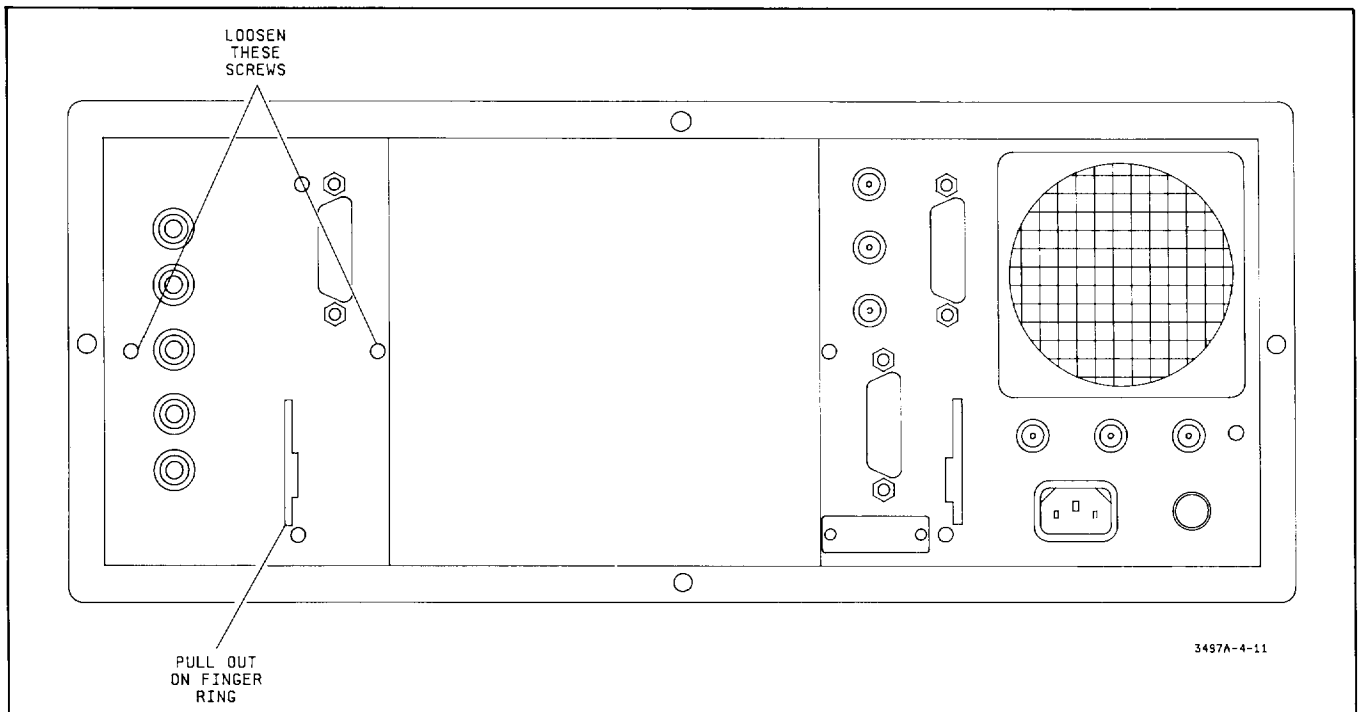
Inguard Board Mounting Screws and Finger Ring
